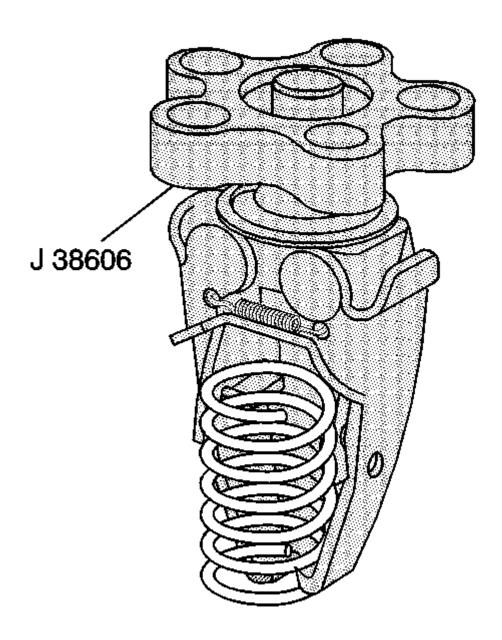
Installing Valve Spring Courtesy of GENERAL MOTORS CORP.
